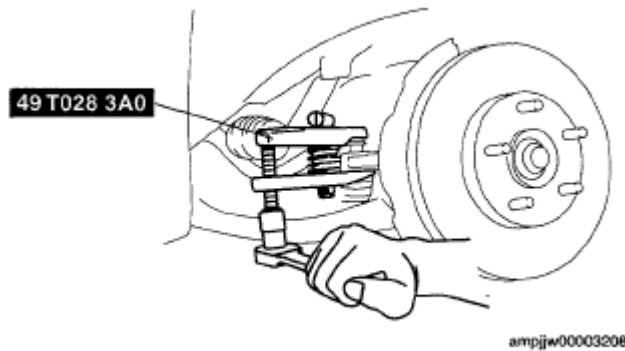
Disconnecting Tie-Rod End Ball Joint
